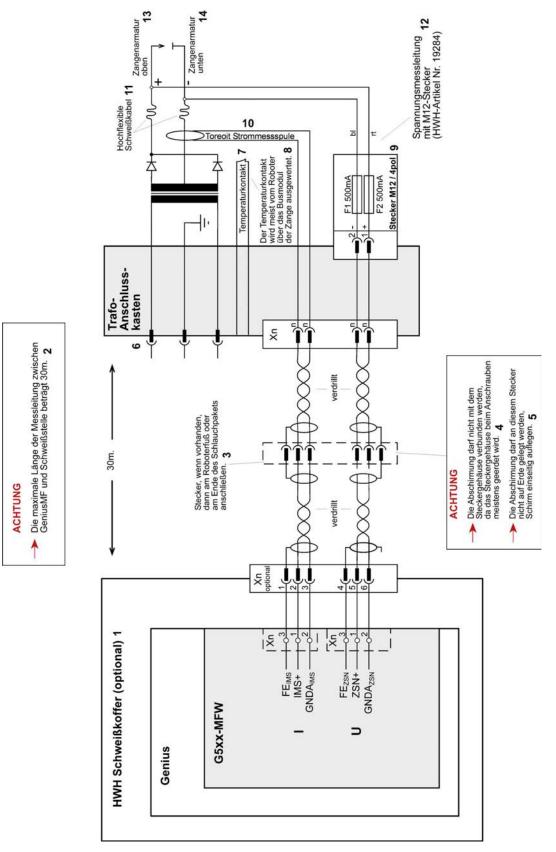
Measuring sensor wiring diagram (legend on next page)
